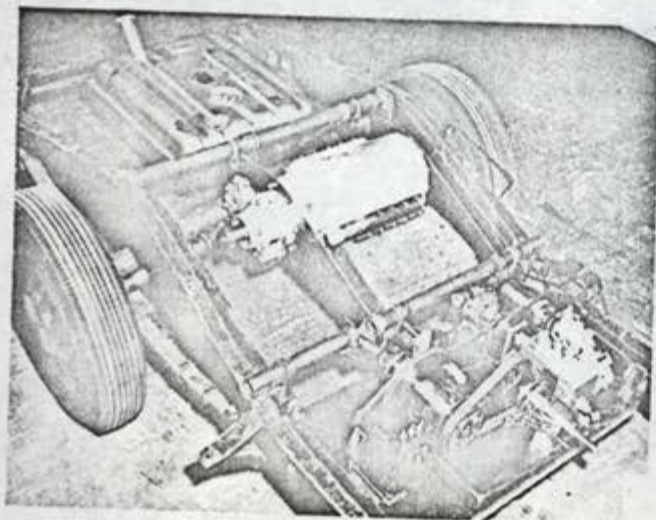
Installation of Paxton equipment mounted under floor of trunk in 1953 Ford coupe
